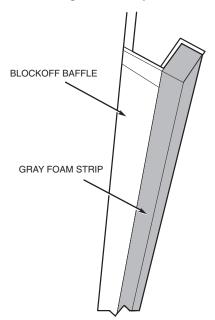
Adding Seal Strip to Blockoff Baffle
